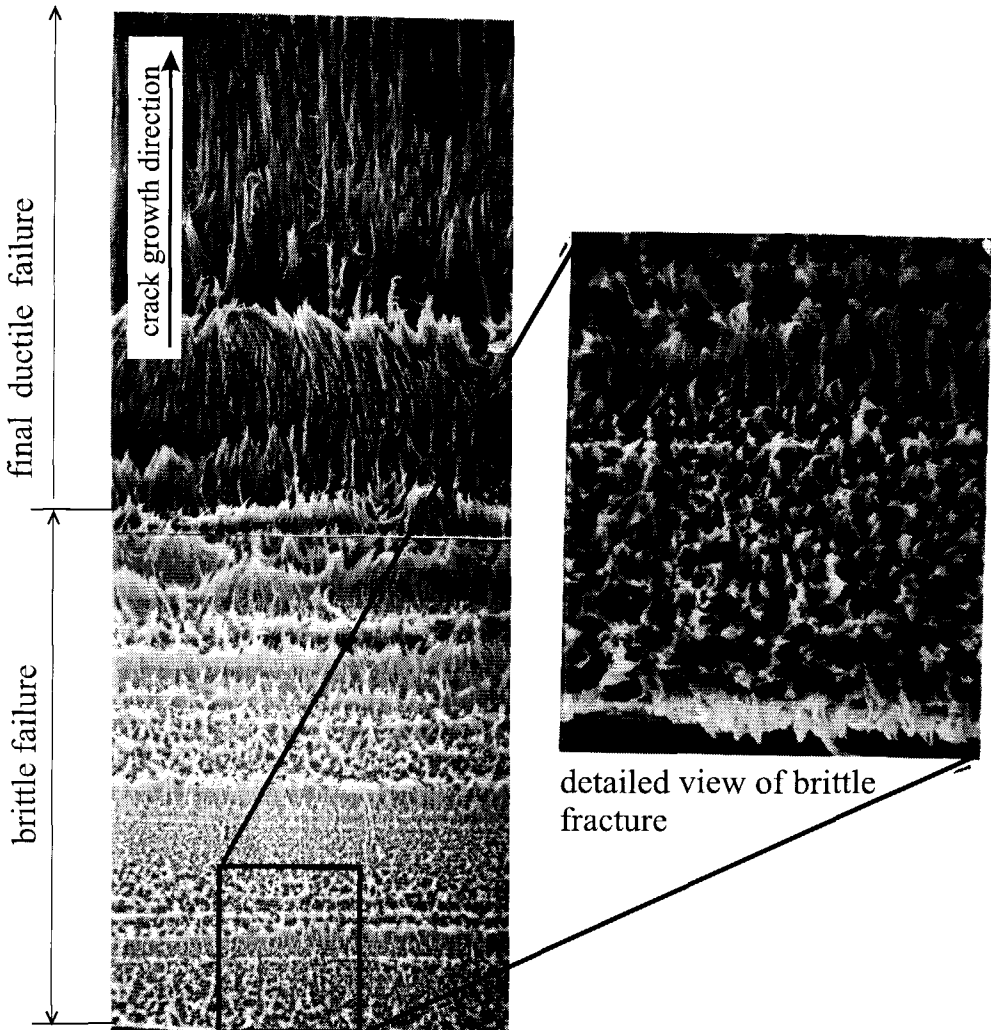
Overview of the fracture surface of a PENT test specimen (material O, $\sigma = 2.4$ MPa, 80°C).
